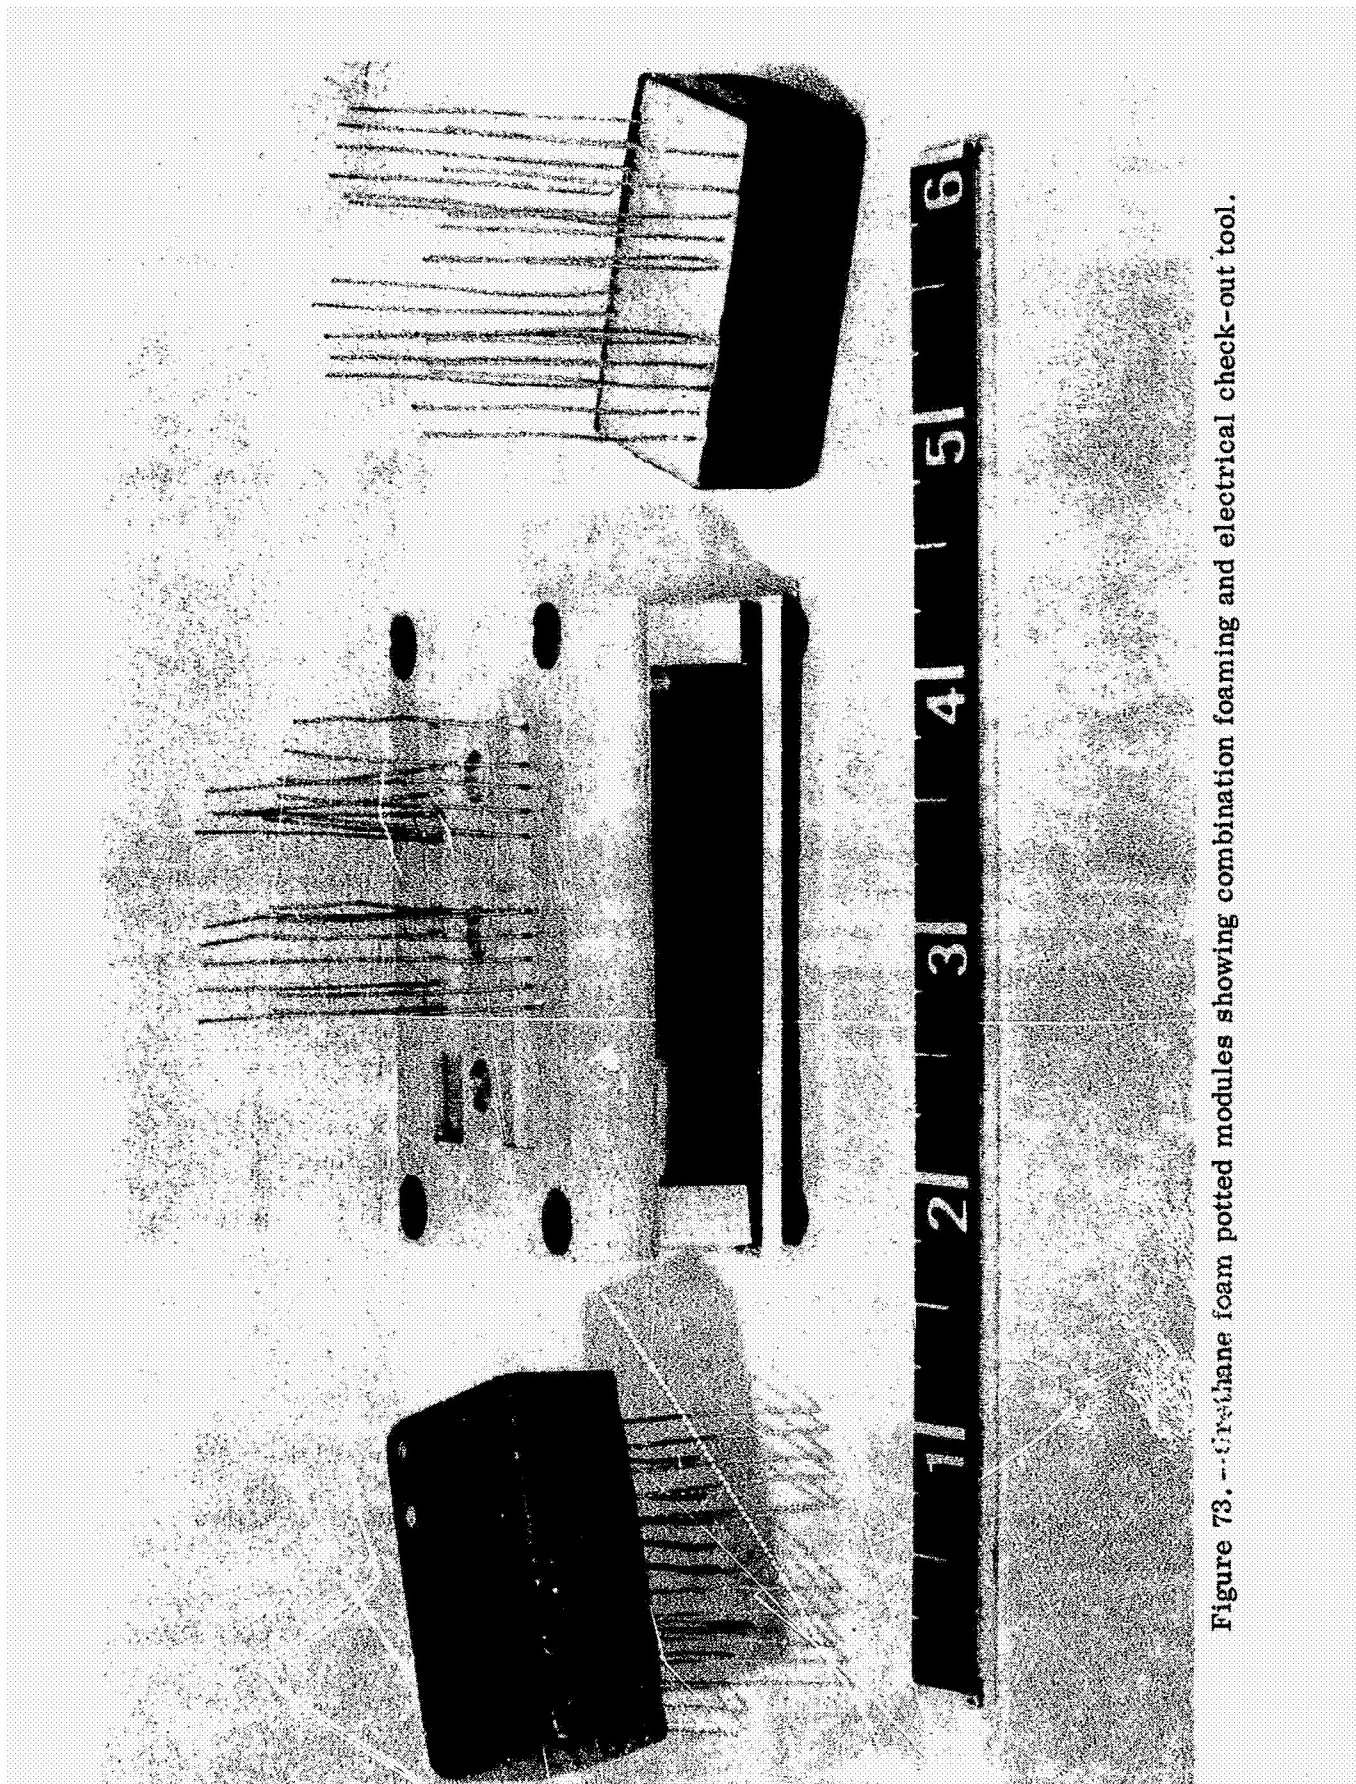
Greechane foam potted modules showing combination foaming and electrical check-out tool.
